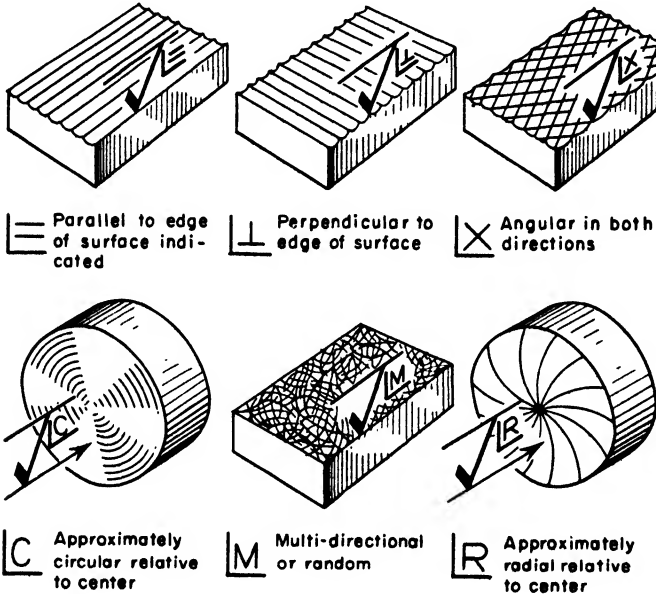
12. Lay of machined surfaces and their designations in the Rms microinch symbol. (Courtesy of Surface Checking Gage Company.)
